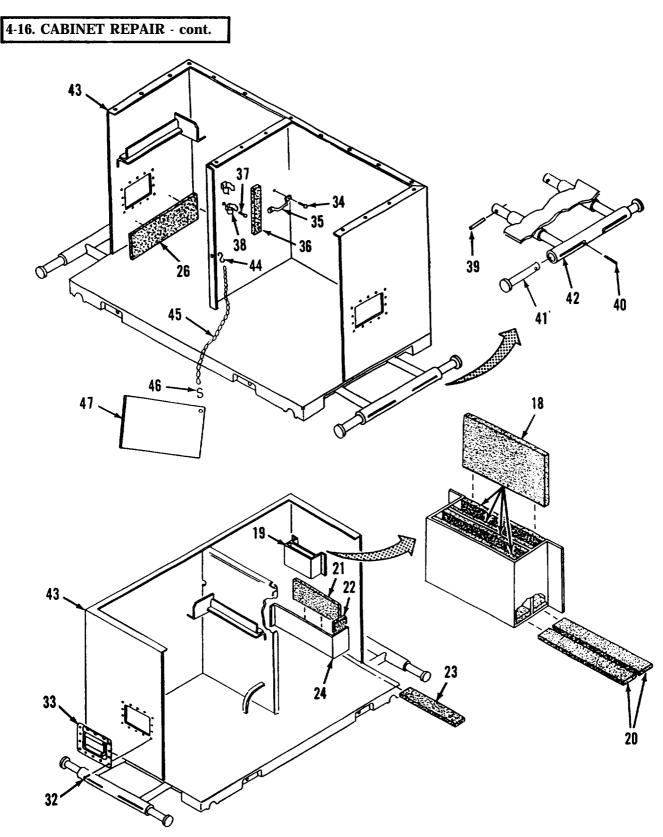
Cabinet Assembly Sheet 2 of 2).
